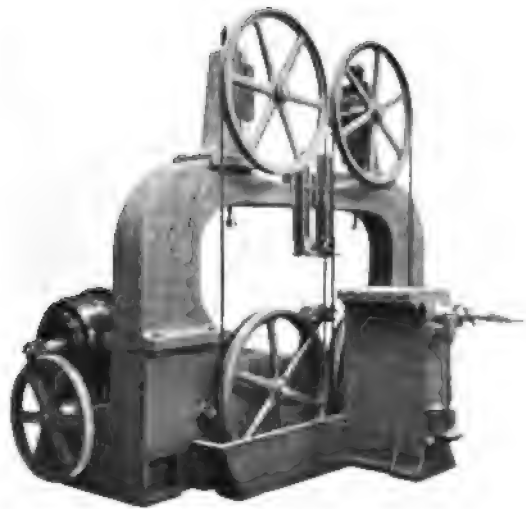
DOUBLE BAND SAWING MACHINE FOR METAL.
